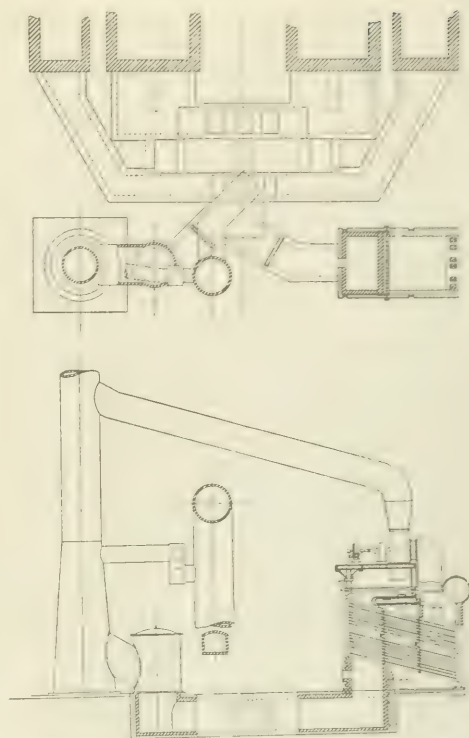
WASTE-HEAT BOILER FOR OPEN-HEARTH FURNACE
